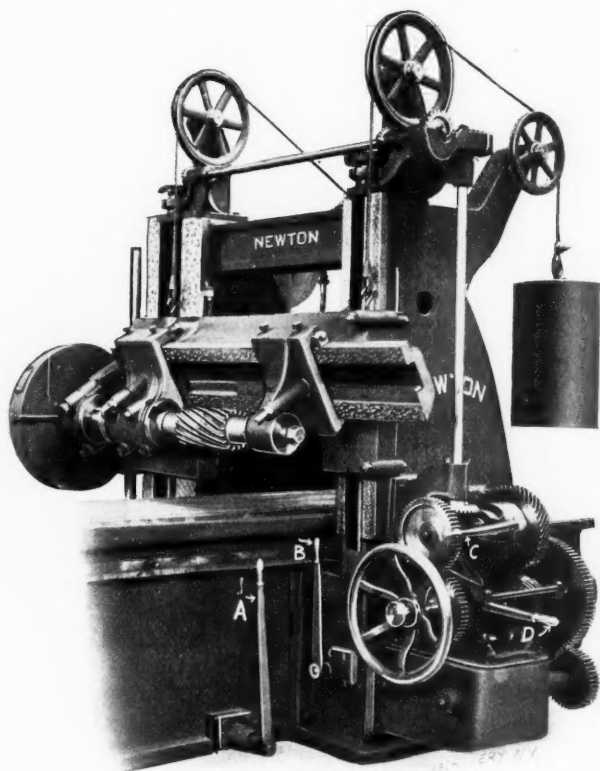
The Operating Side of the Newton Standard Horizontal Miller
